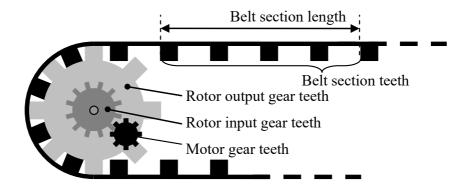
Relationship between motor, rotor and conveyor
